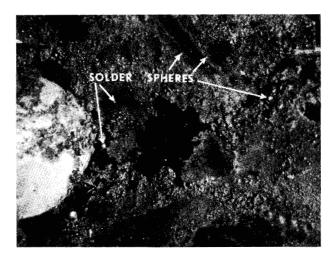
Solder spheres on surface of product resulting from explosion of residual solvent vapor during soldering process.
